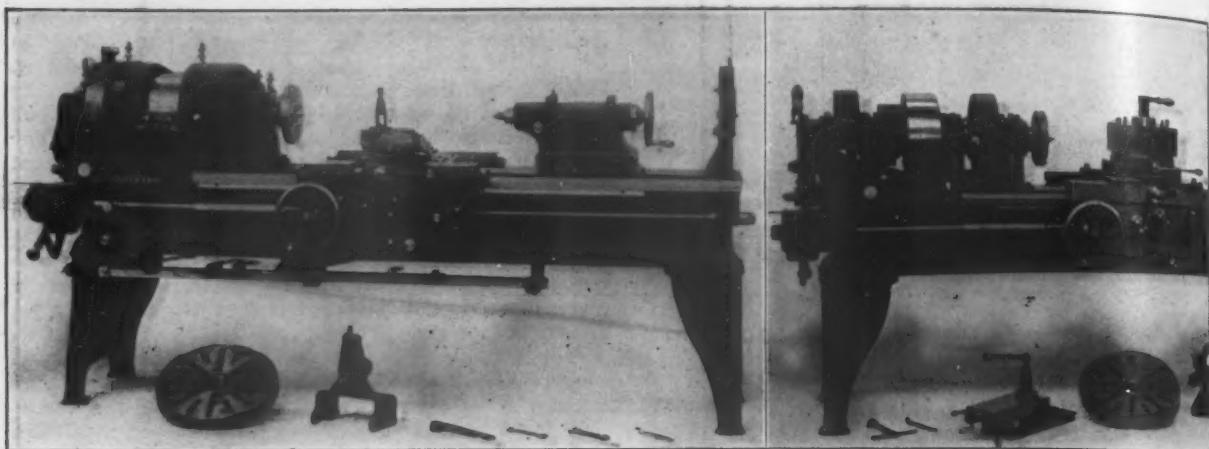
Cast Iron Cover Completely Inclosing Headstock Gearing.
